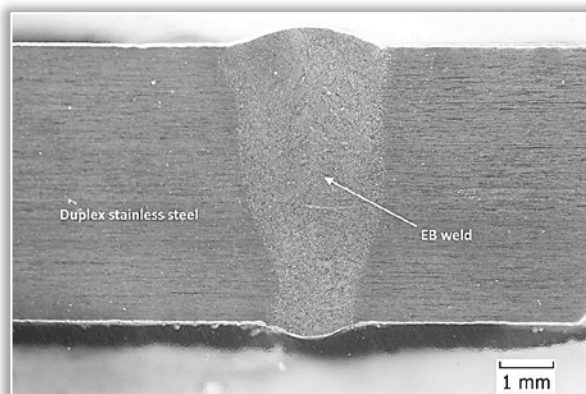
Macrostructure of cross-sectional view of the EBW joints with 10 mm.s^{-1} welding speed and average oscillation 3 mm
